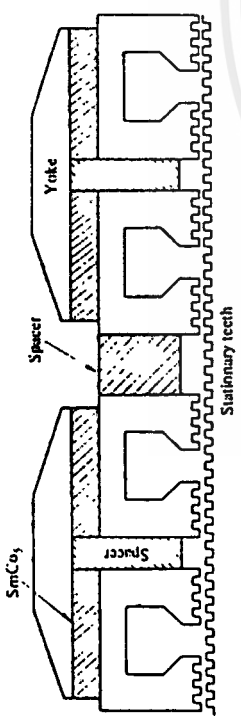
Structure of a linear PM motor used in an automated drafting machine.
